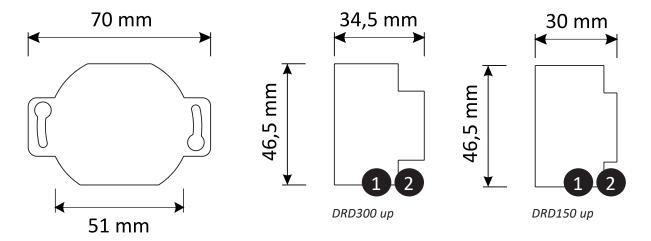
Dimensions and operating elements - DRD150/300 up
